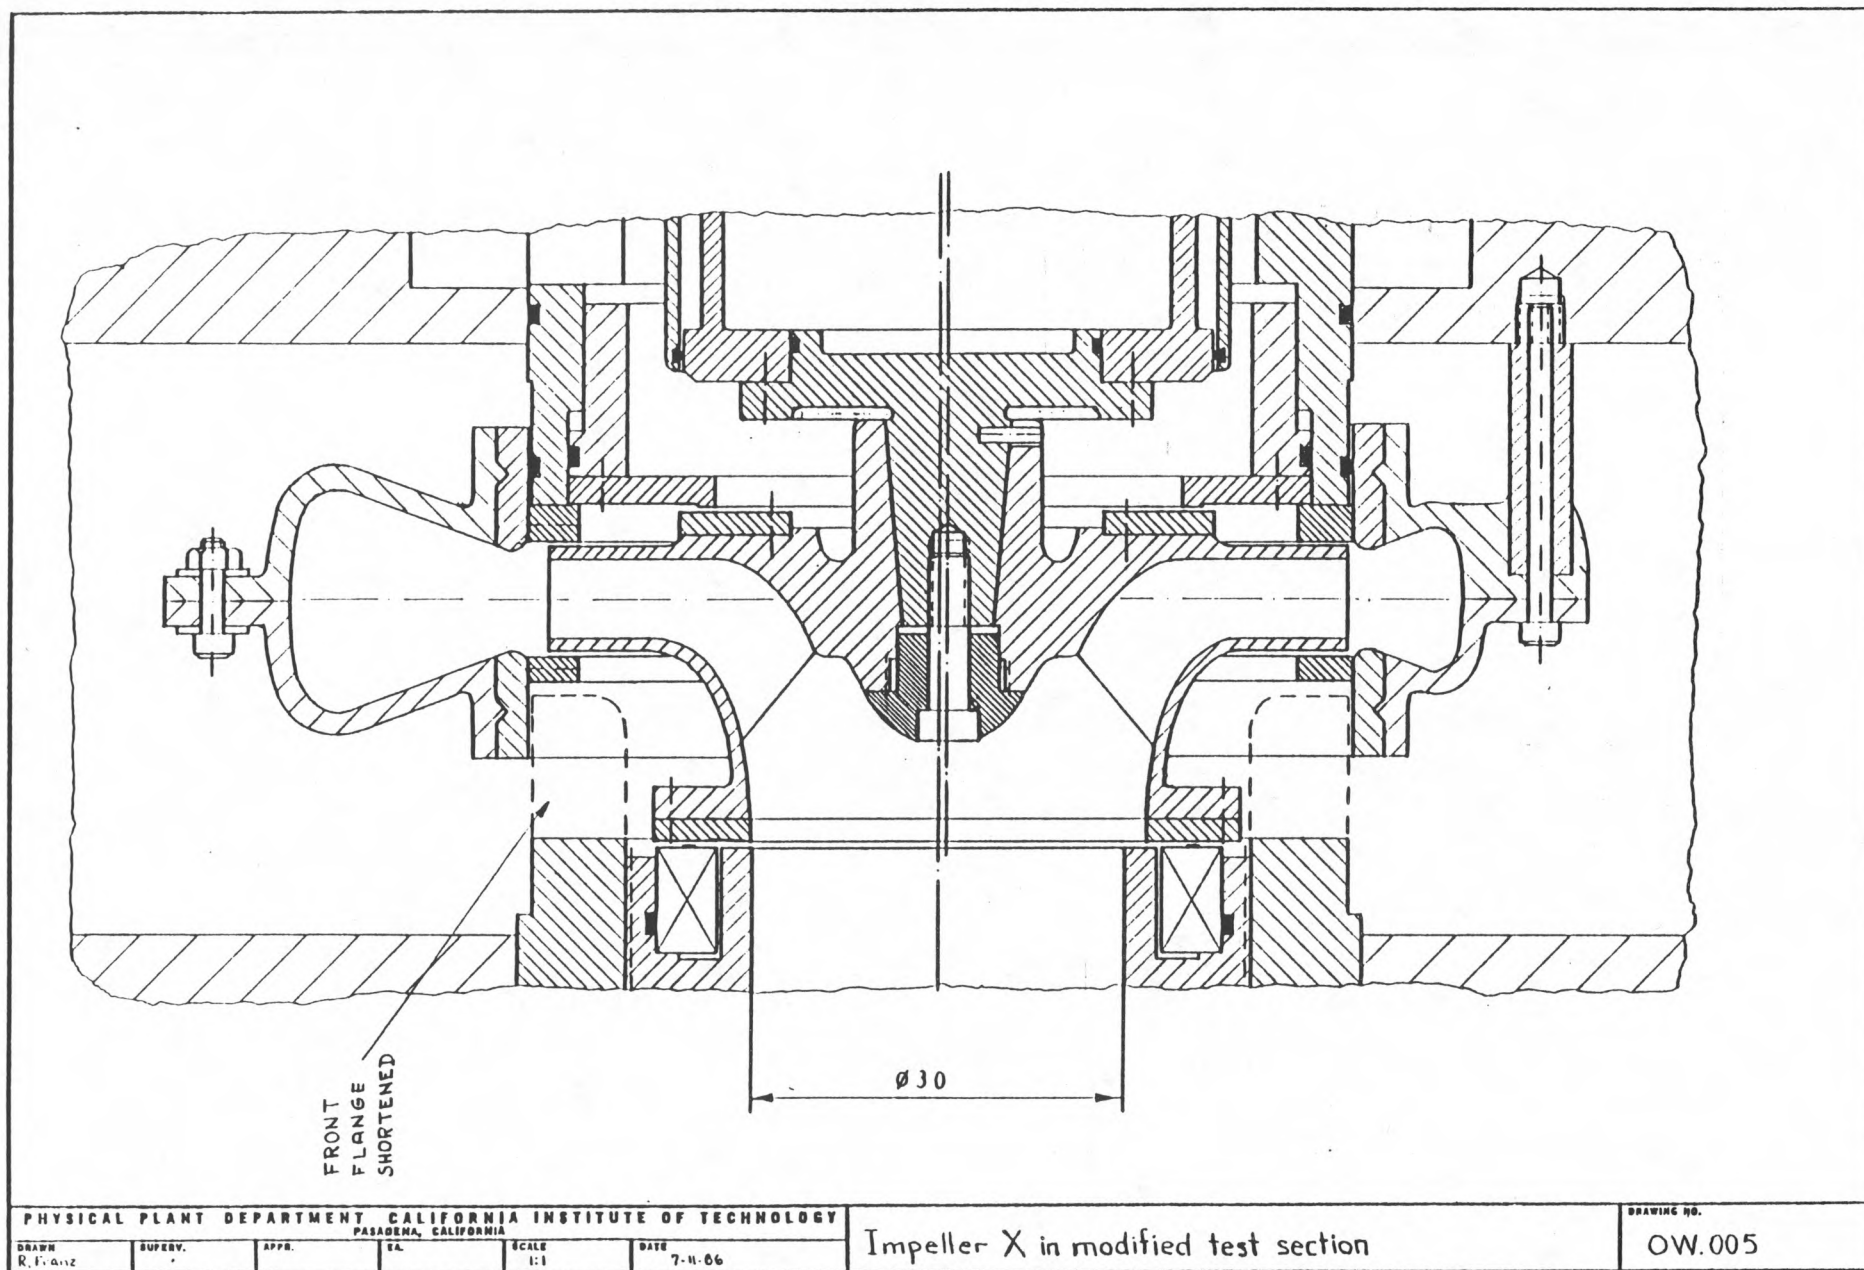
Assembly drawing of impeller X in the modified test section, with the inlet flange shortened.
